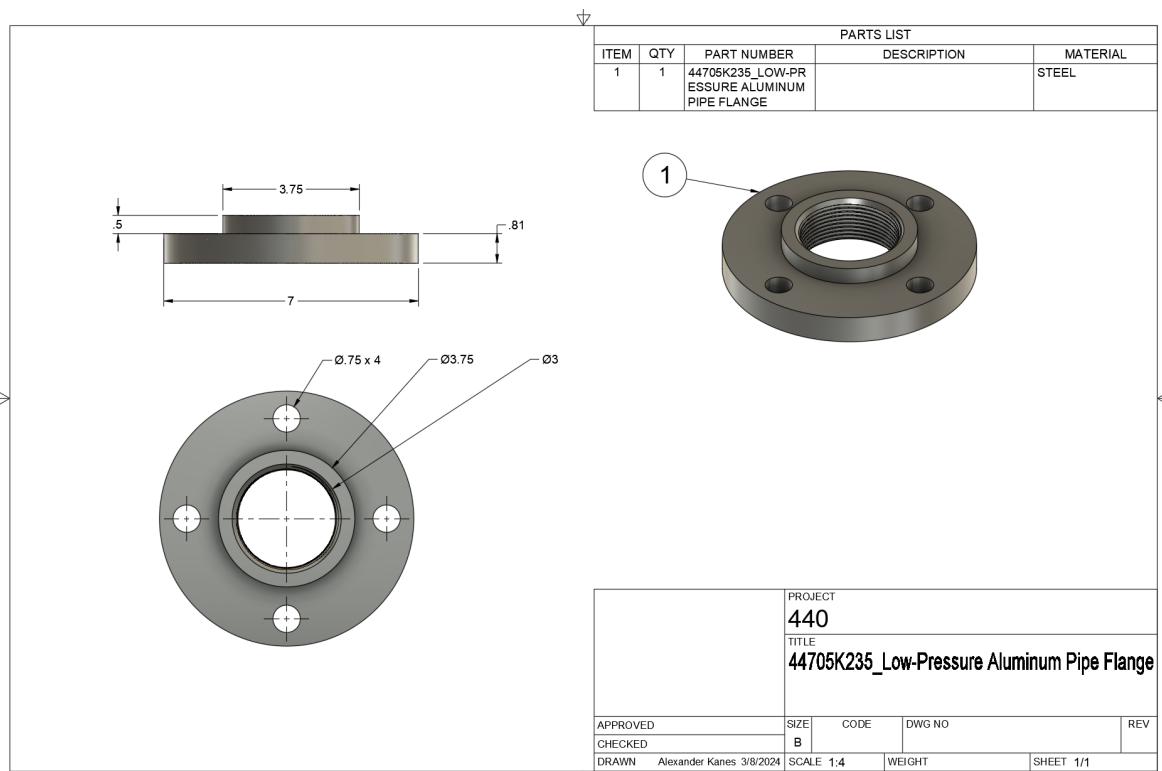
2D Drawing of Low-Pressure Aluminum Pipe Flange.
